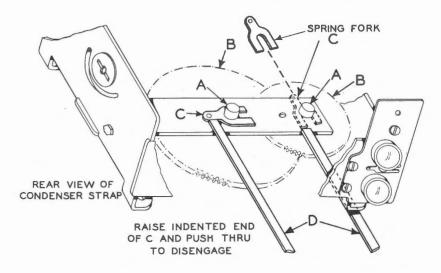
Condenser — Removal of Drive Gears (Rear View)
